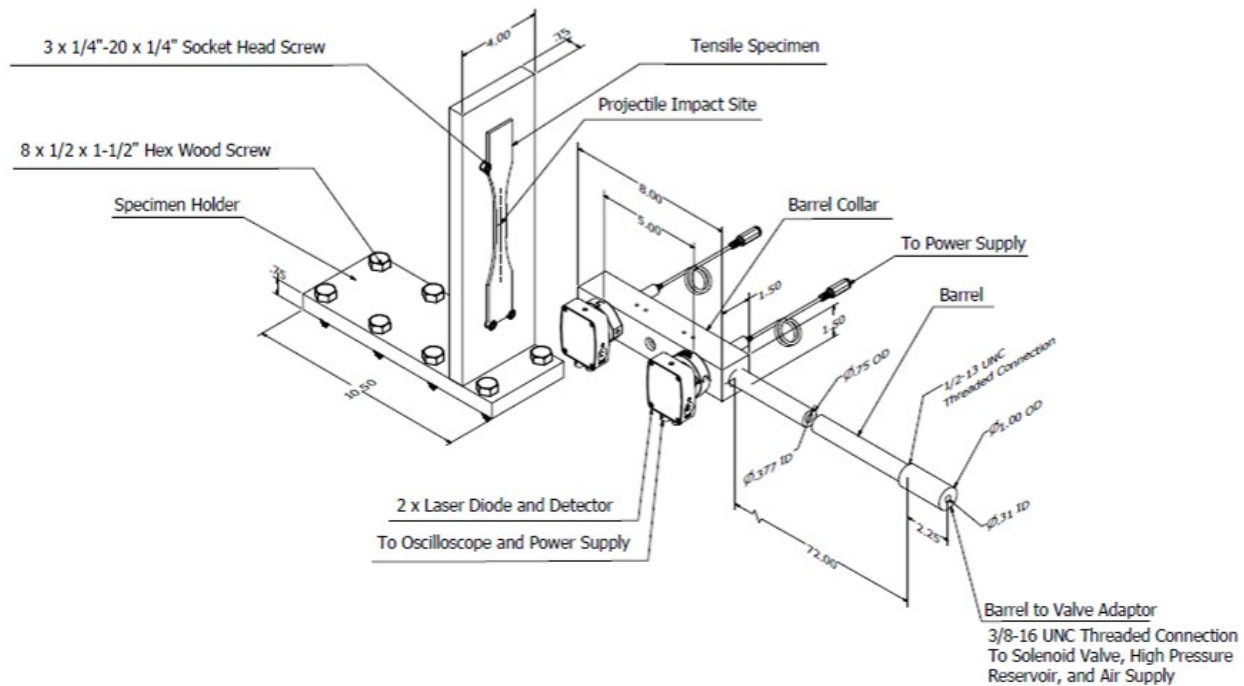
Sketch showing the gun specimen holder, gun barrel, and laser diodes and detectors.
